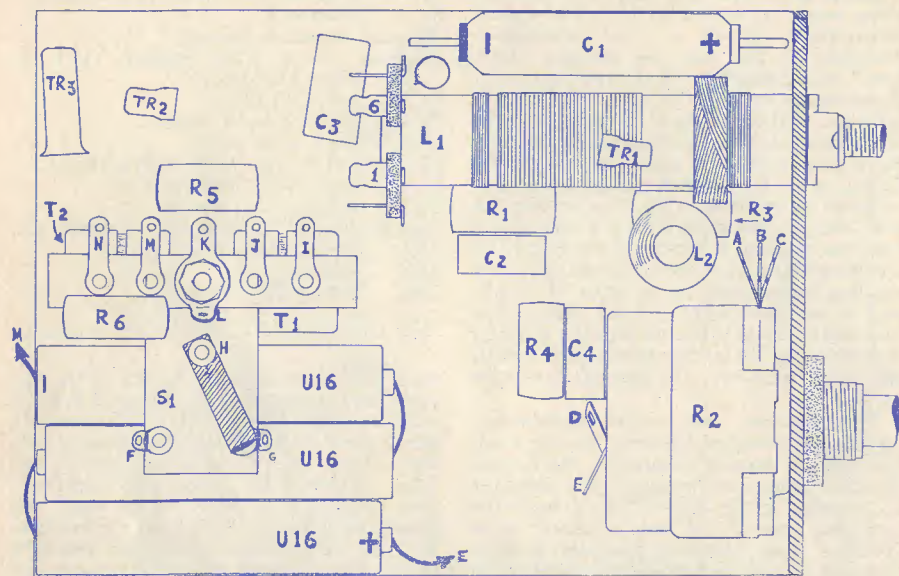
General layout of the components on the completed chassis assembly. Note: The Ferrite rod material has been omitted for clarity
